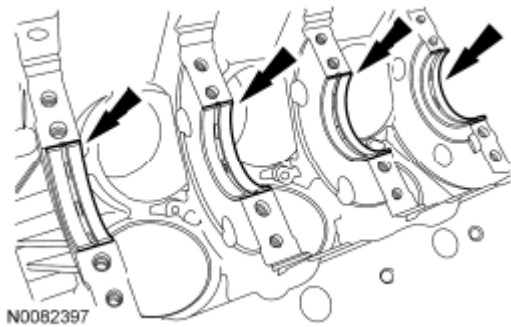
Locating Crankshaft Main Bearings To Cylinder Block
